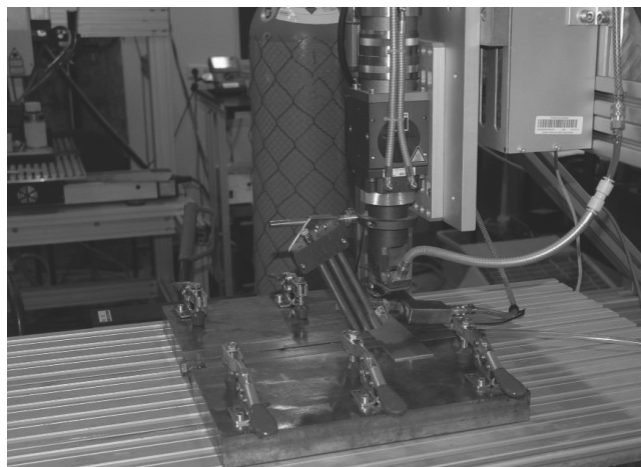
A view of the experimental setup with the TRUMPF TruDISK 3302 laser, welding head and shielding gas system with multi nozzle protection, including trailing nozzle and groove protective nozzles (Table 4).
